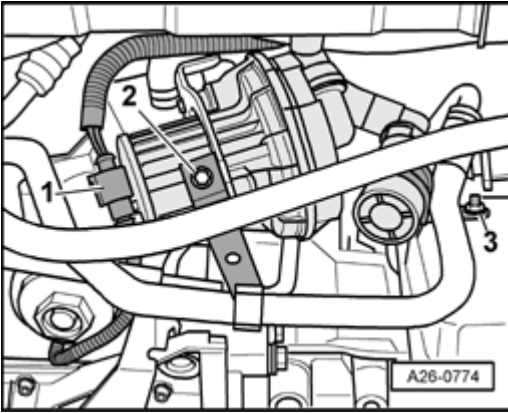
Disconnecting Electrical Connector At Secondary Air Injection (AIR) Pump Motor -V101-
